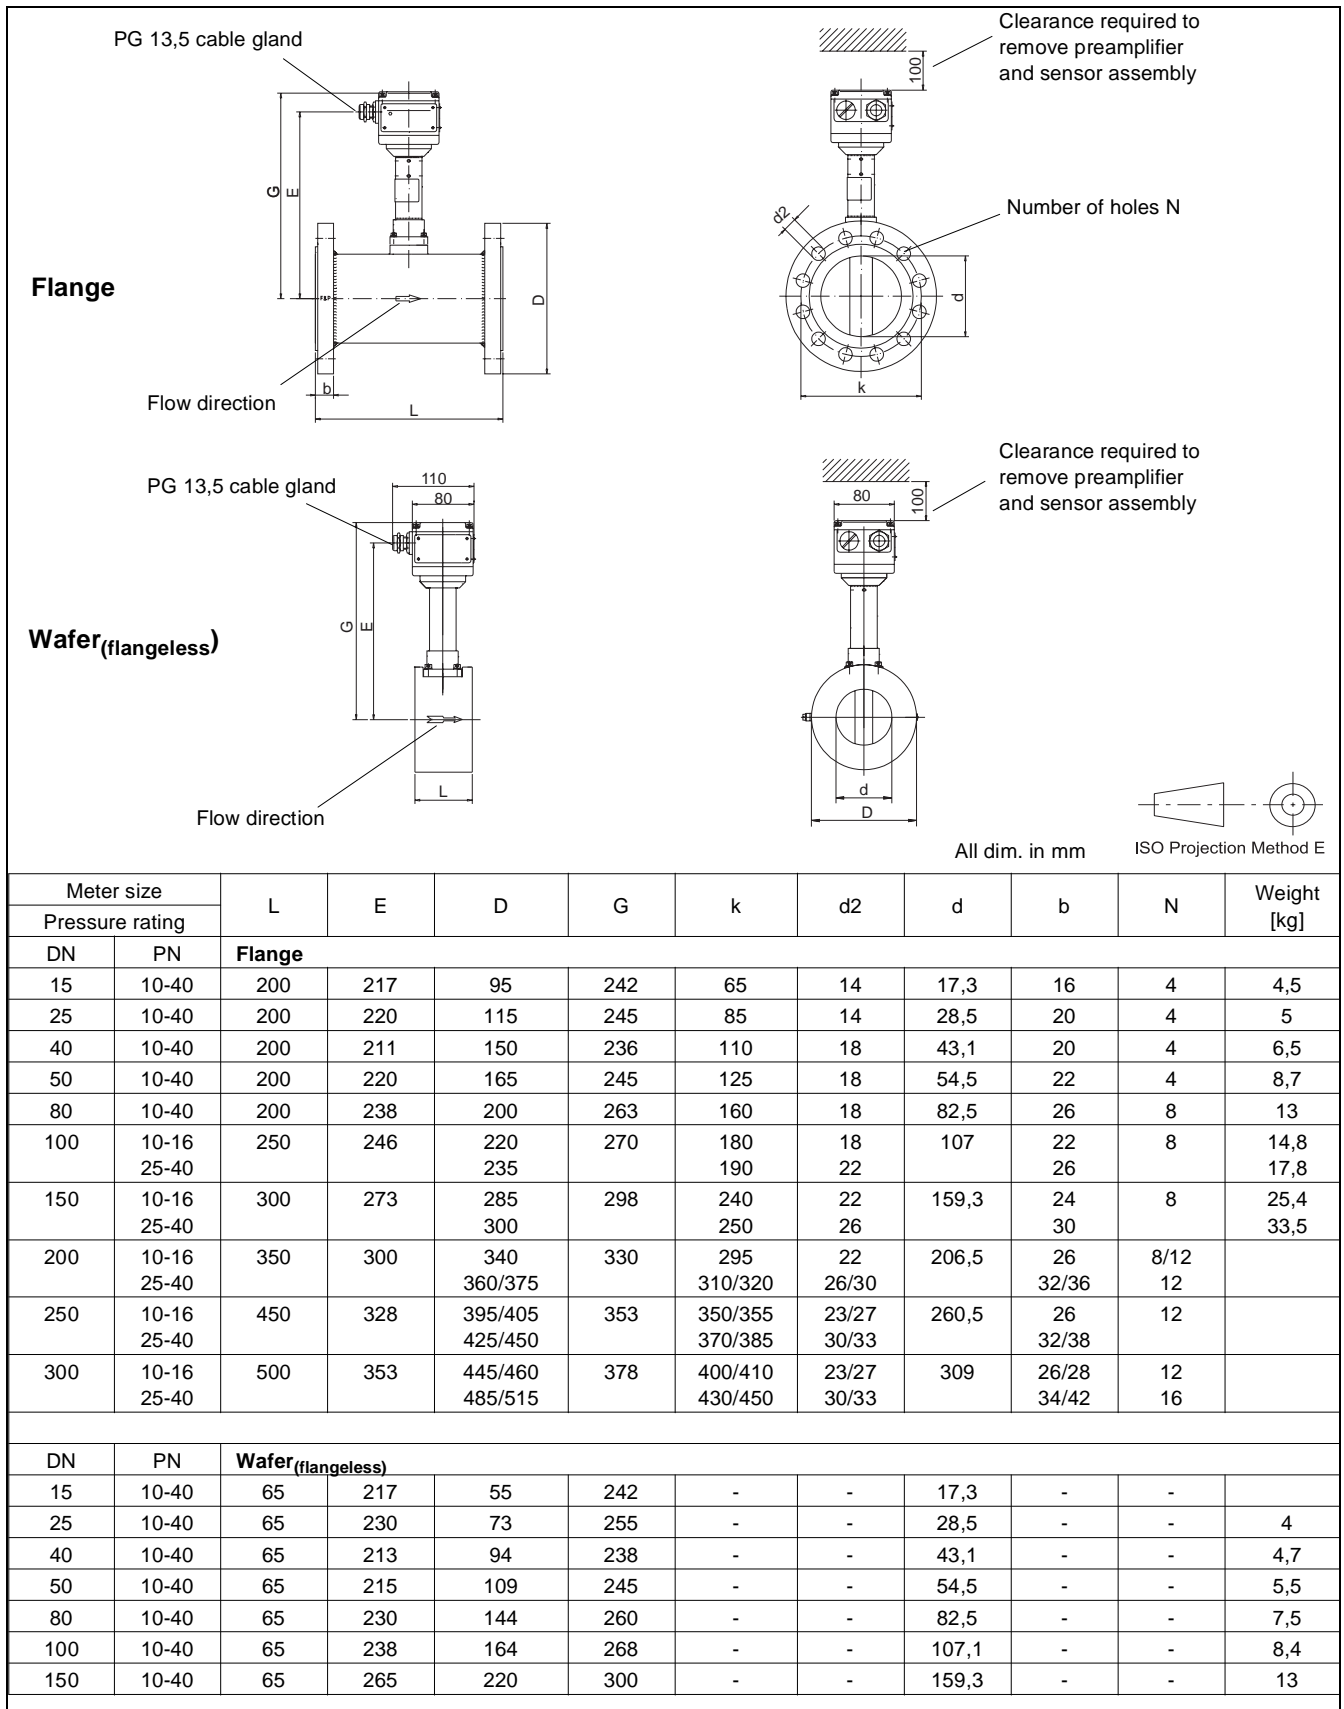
Dimension drawings of VORTEX-VM primary, DIN
